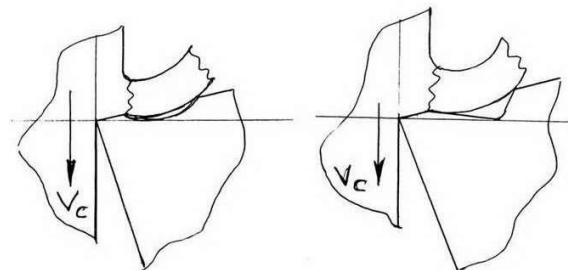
Step type in-built chip breaker (a) Parallel step
